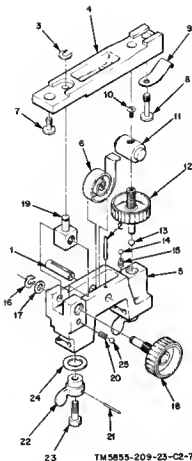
Night sight, exploded view (AN/PVS 3A)
